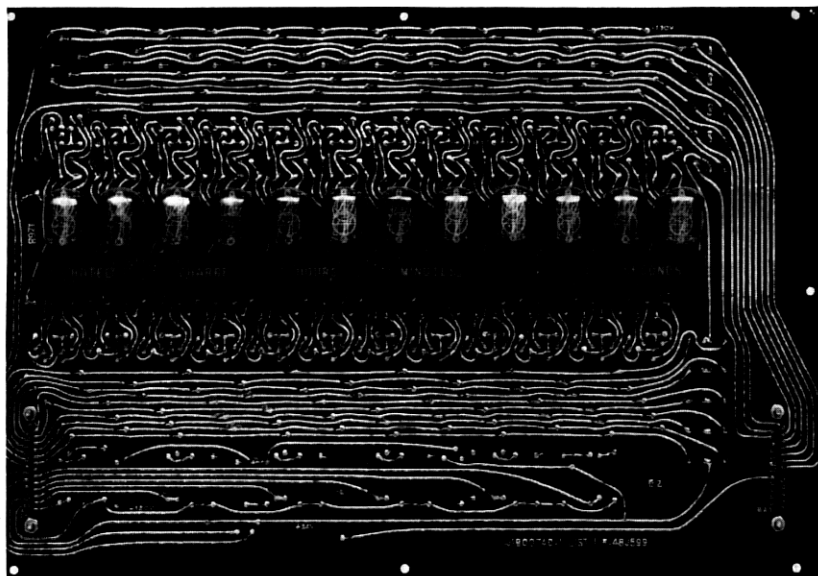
Shield mounted on the rear of the numerical display unit assembly.
